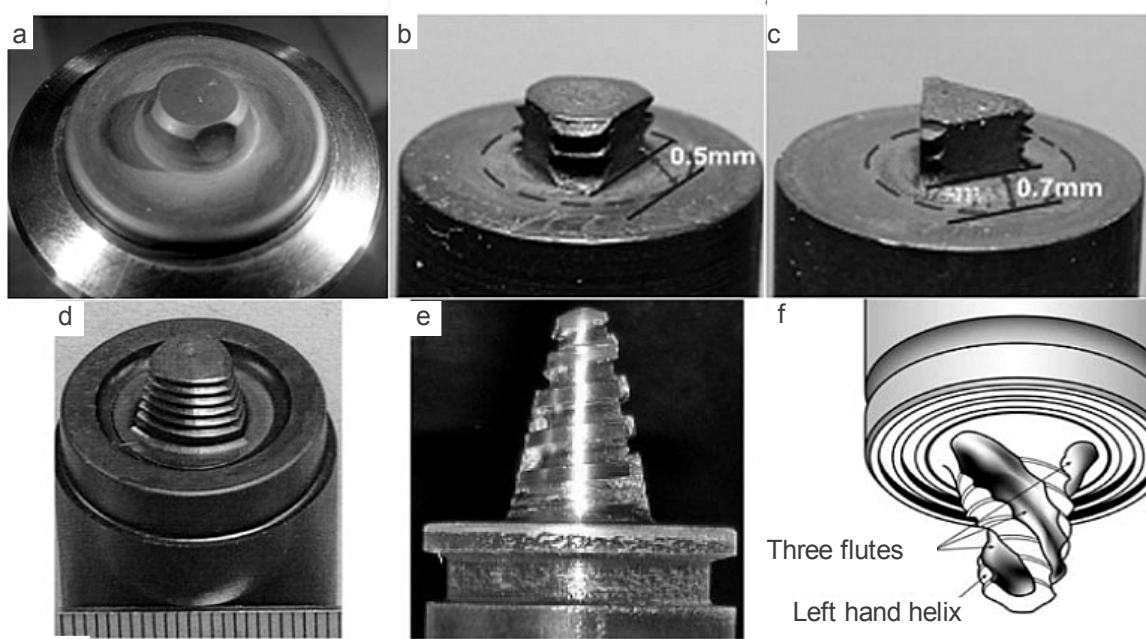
Commonly used tool pin geometries: a ... pin with machined flats; b ... three flat threaded; c ... triangular; d ... Trivex™; e ... threaded conical; e ... Triflute™ [36]
